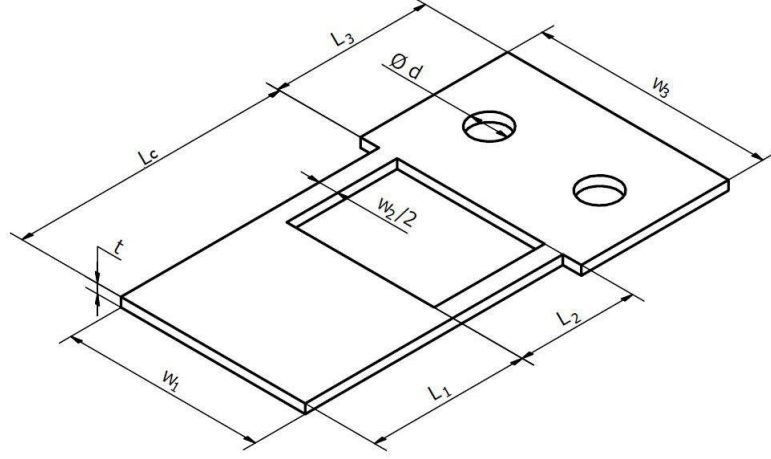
Drawing of used macrocantilever with dimensions used in the calculation.
